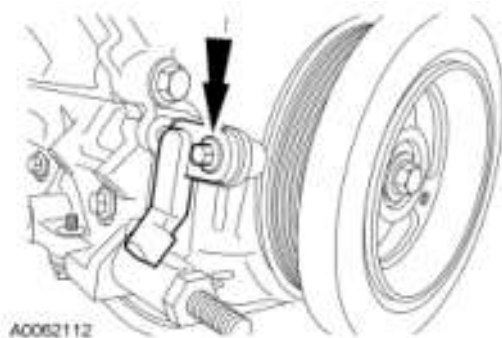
Locating Crankshaft Position (CKP) Sensor Bolt
